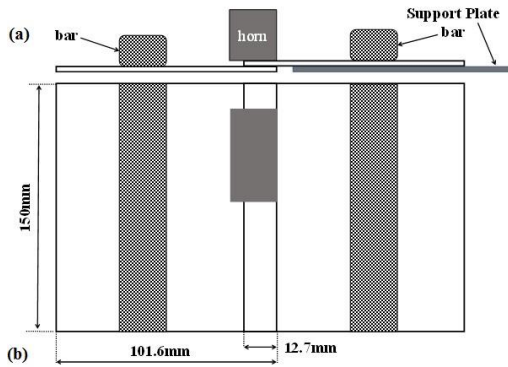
Schematic of placement composite plates in fixture. (a): Front view and (b): Top view.
